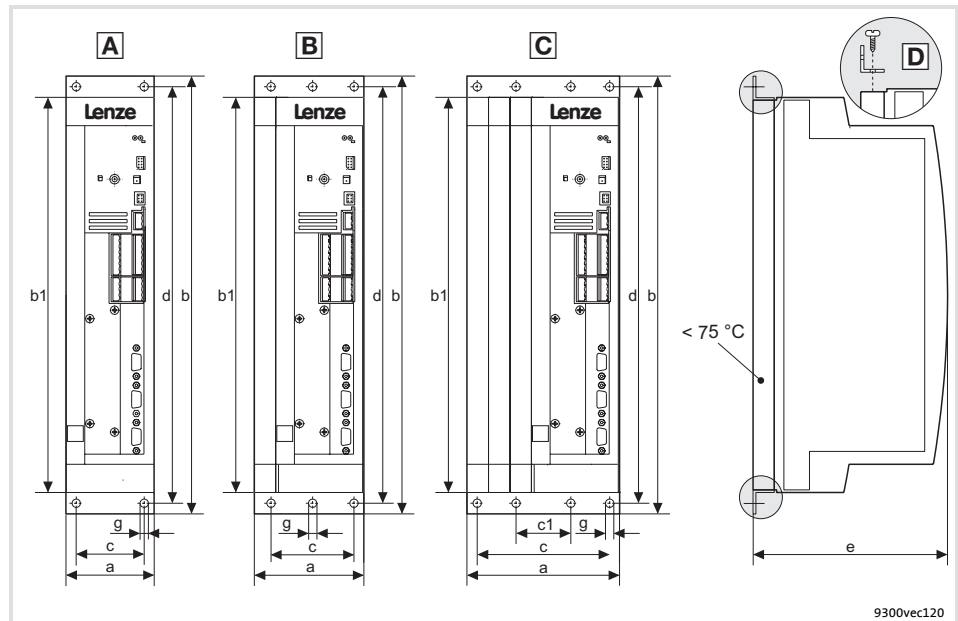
Dimensions for mounting in "cold plate" technique 0.37 ... 11 kW
